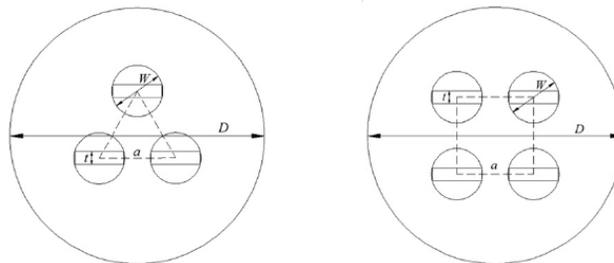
Sectional view of tube fitted with triple and quadruple twisted tapes
